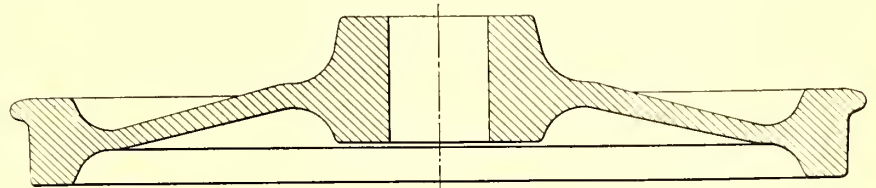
SECTION OF ROLLED STEEL WHEEL
